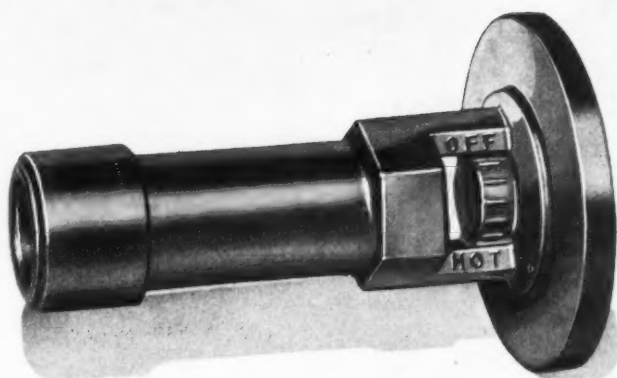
A Brass Die-casting which is Cored to a Diameter of 15/16 Inch for a Depth of 3 Inches in One End
